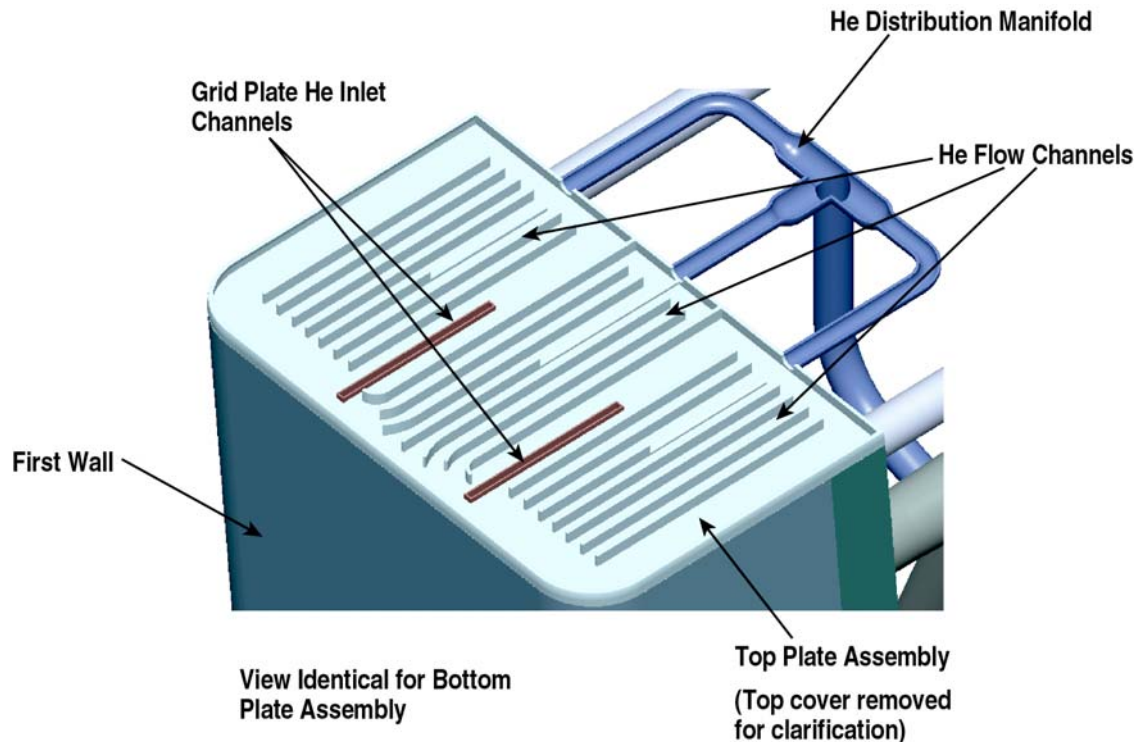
Top plate assembly internal details, top cover removed for clarity.
